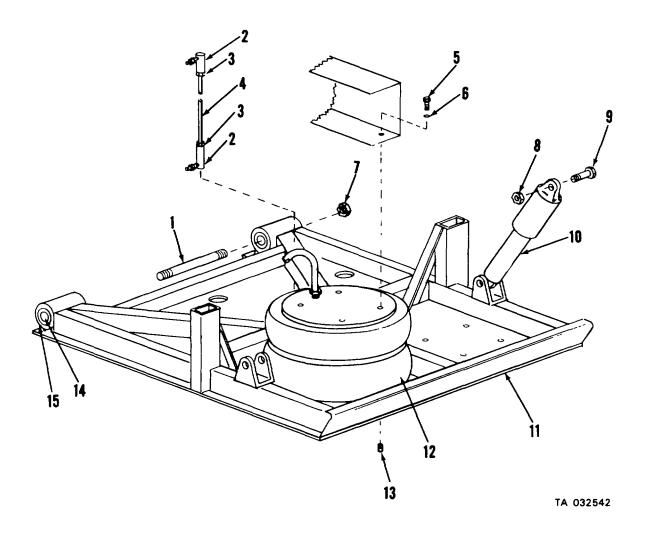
Air mounted fifth wheel kingpin assembly, XM847, XM848, XM849, XM850, XM912, XM913.
